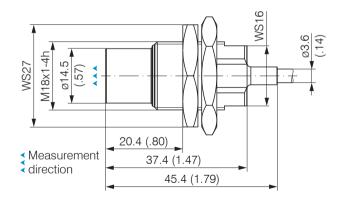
Dimensional drawing sensors ES-U6-C-CAx/mB0
